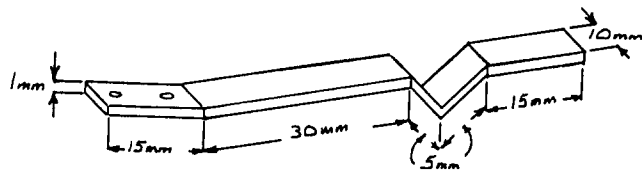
From a 10mm x 1mm thick piece of strip steel construct a switch as shown in Fig. 3. Use a drawing pin as the second contact.
